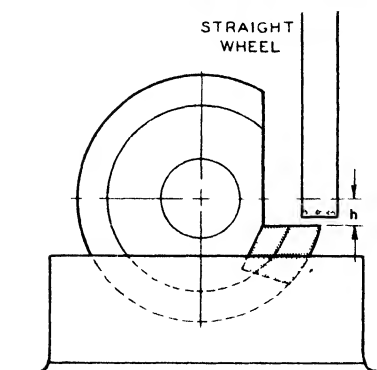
Grinding a Circular Forming Tool Held in a Vise
